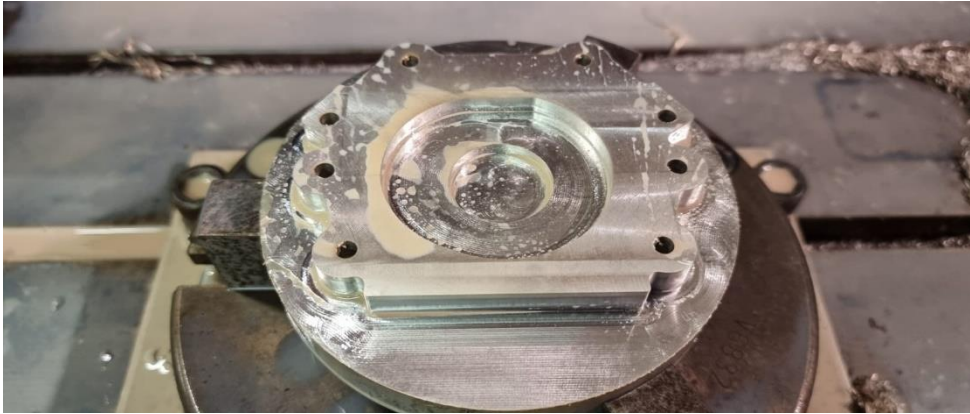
Results of the fabricated part obtained after computer aided manufacturing and machining.
